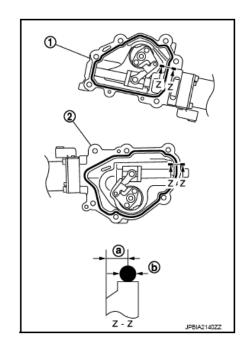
Identifying Liquid Gasket Applying Dimensions Of VVEL Actuator Sub Assembly Courtesy of NISSAN MOTOR CO., U.S.A.
